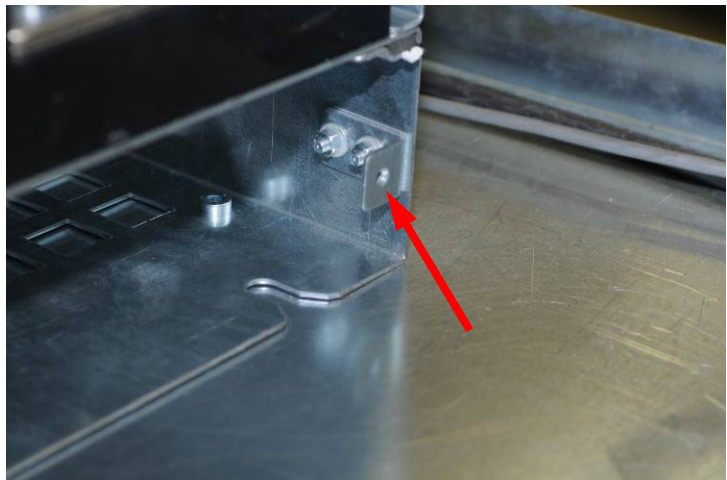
Mounting tab installed on right side of D3/D4 frame.
